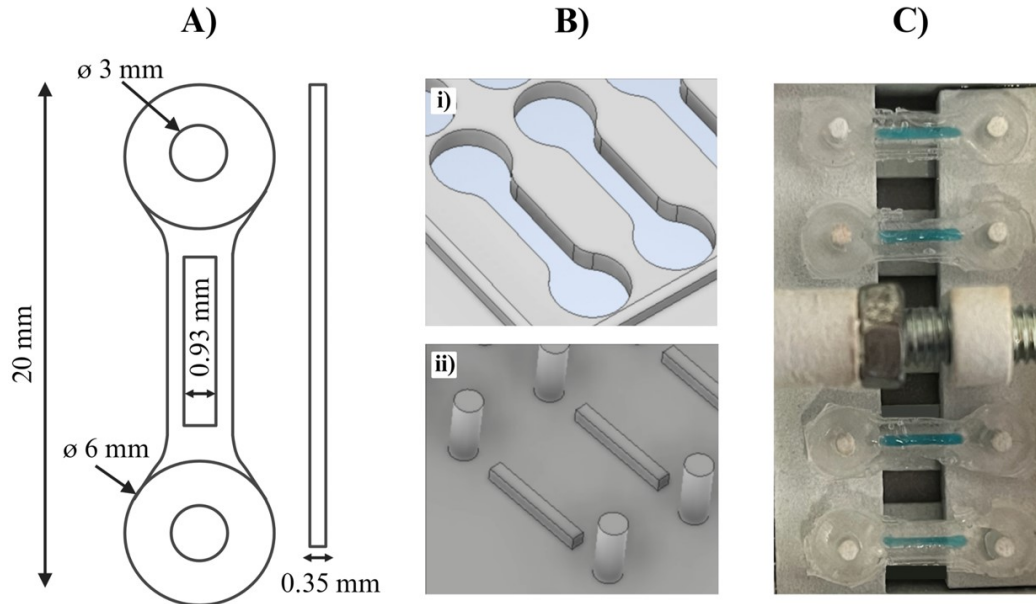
Supports design and molding. A) Support geometry. B) Mold used for the production of supports consisting of two parts: i) upper and ii) lower plate. C) Supports manufactured with molding technique.
